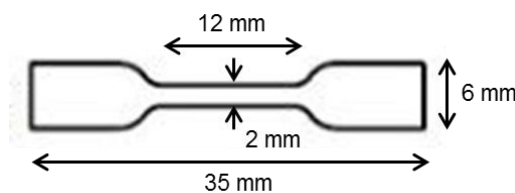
Dimensions of tensile test samples (thickness: 2 mm)
